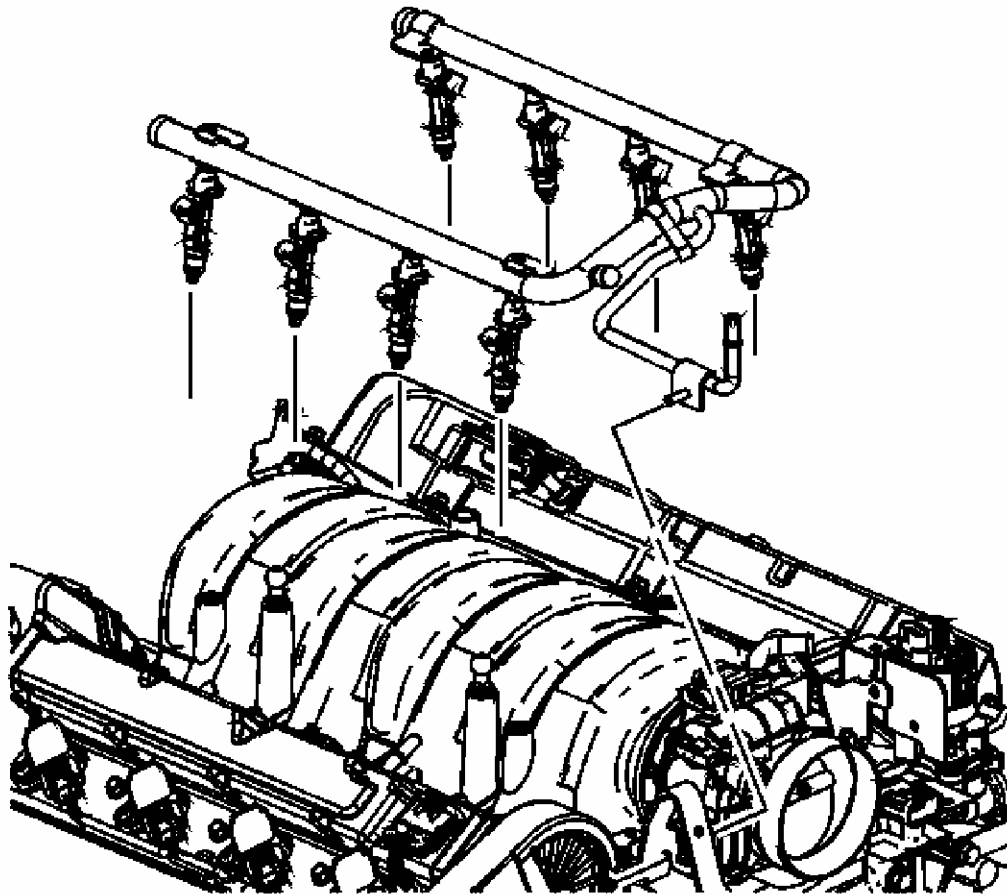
Identifying Fuel Injectors & Fuel Rail
